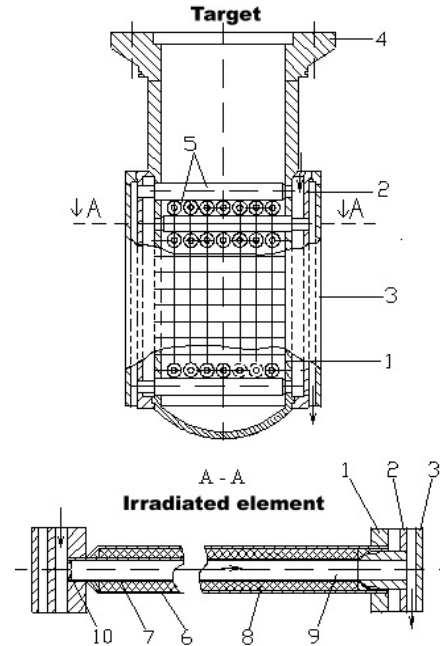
Target. 1, 2, 3 – vessel with channels for coolant; 4 – vacuum ion guide; 5 – irradiated elements; 6, 7 – shells of irradiated element; 8 – fissile material; 9 – coolant channel; 10 – throttle.
